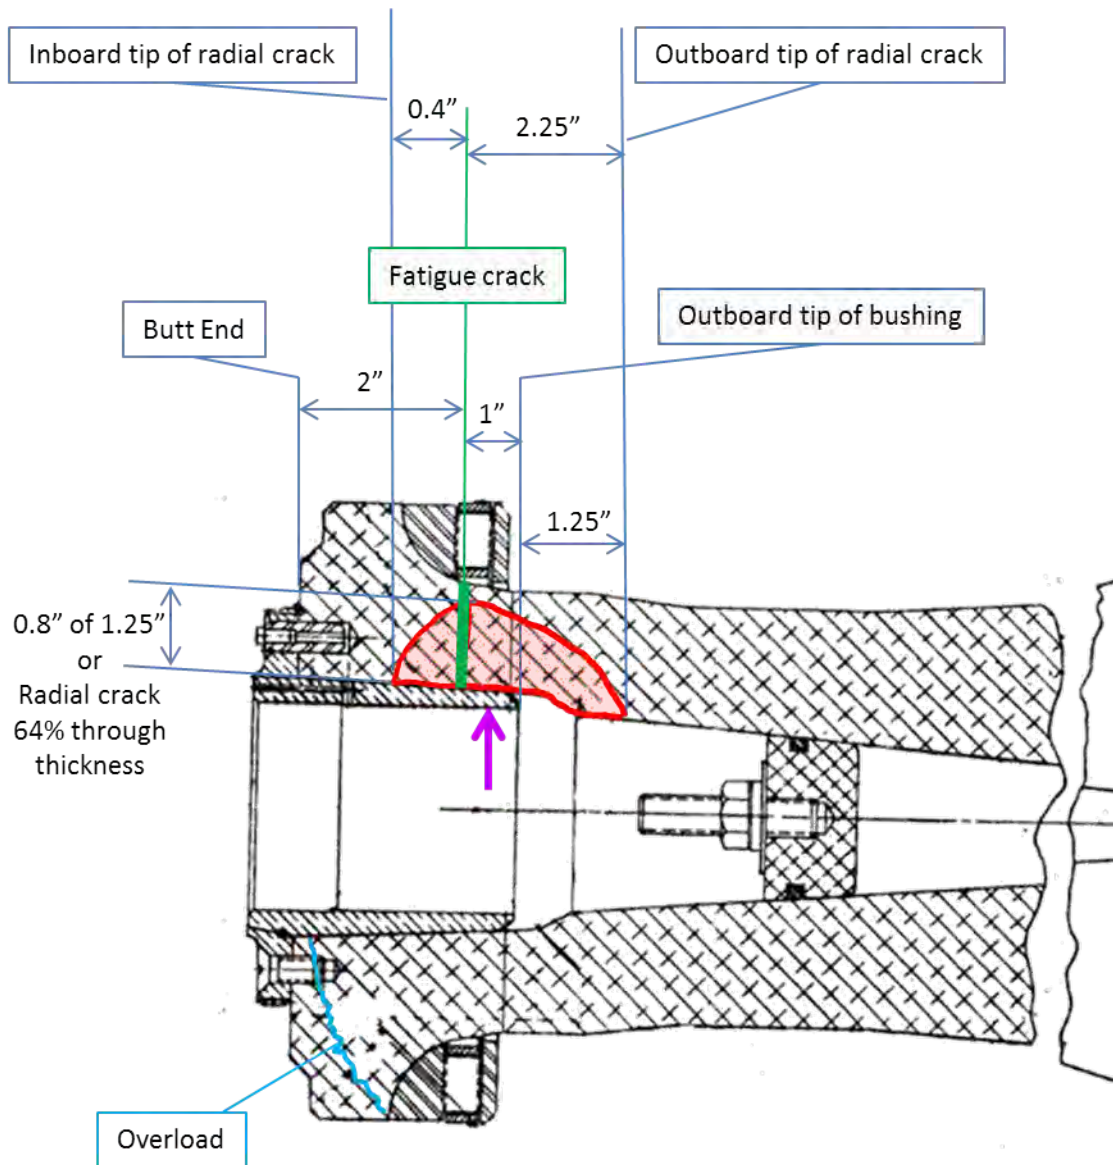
Schematic showing radial and fatigue crack location in cross section and relevant dimensions. Purple arrow indicates approximate origin of radial crack.
